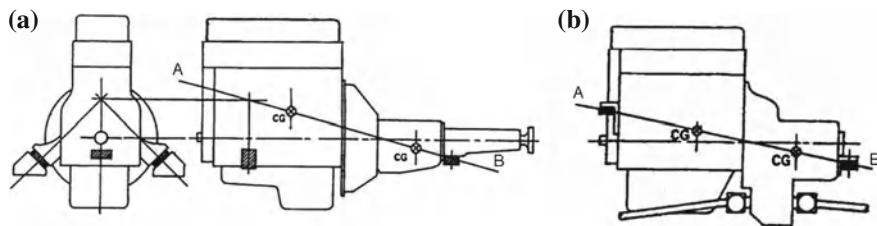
The suspension centers of powertrain mounts are aligned on its principal inertia axis AB, almost coincident with the line through the centers of mass CG of the engine-gearbox unit. a Front-engine, rear-wheels-drive powertrain. b Front-engine, front-wheels-drive powertrain
